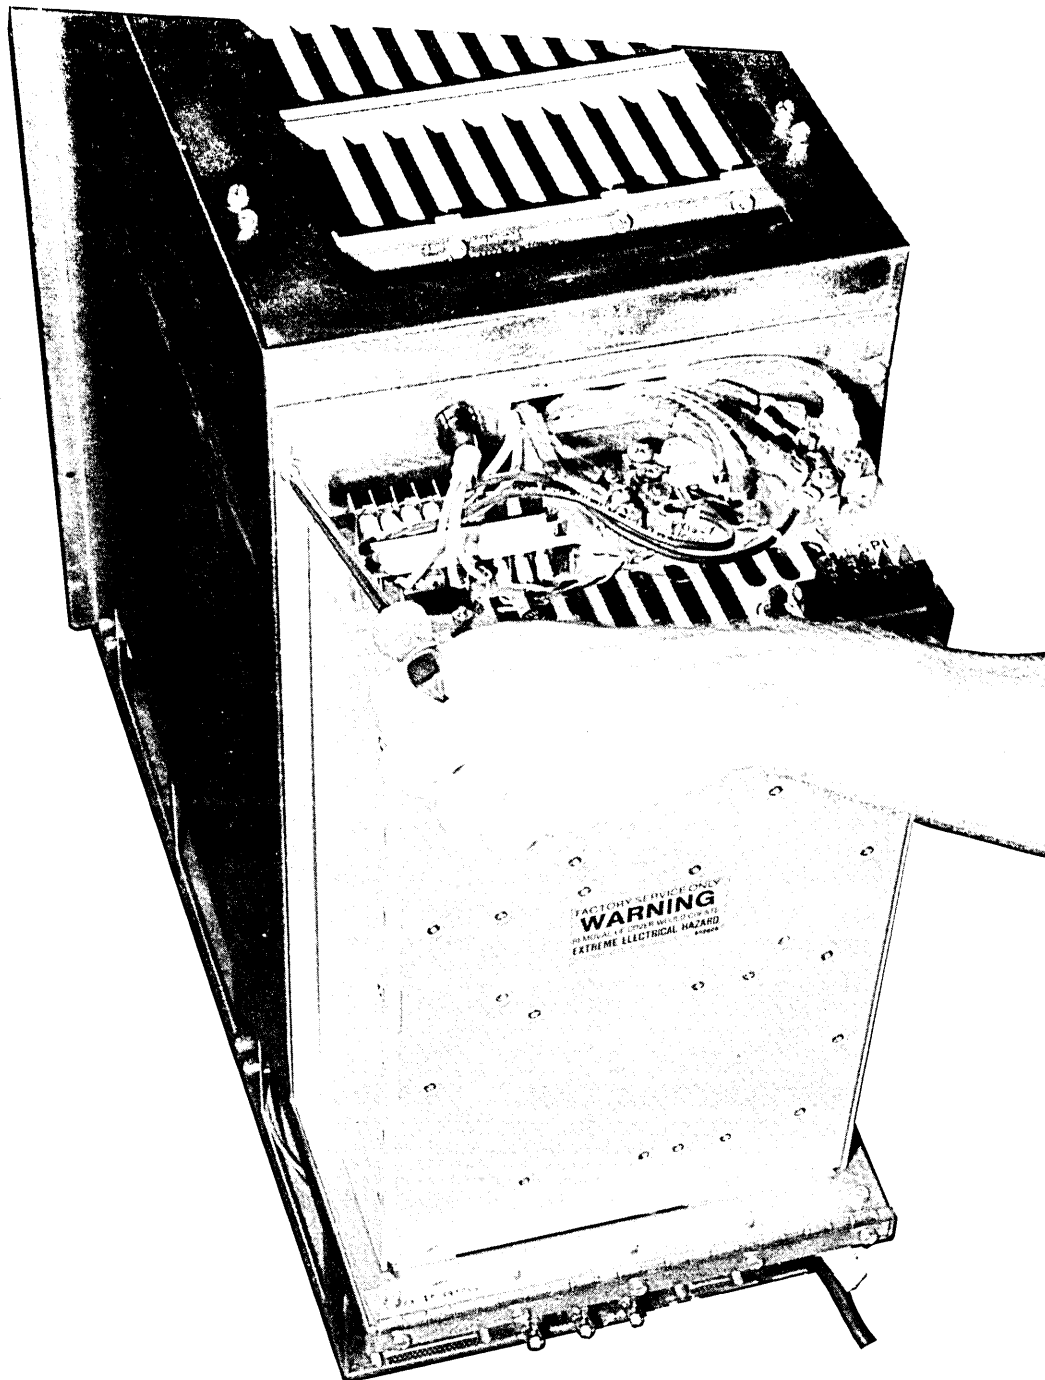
Detaching Power Supply Mounting Bracket from Display Generator Chassis Assembly
